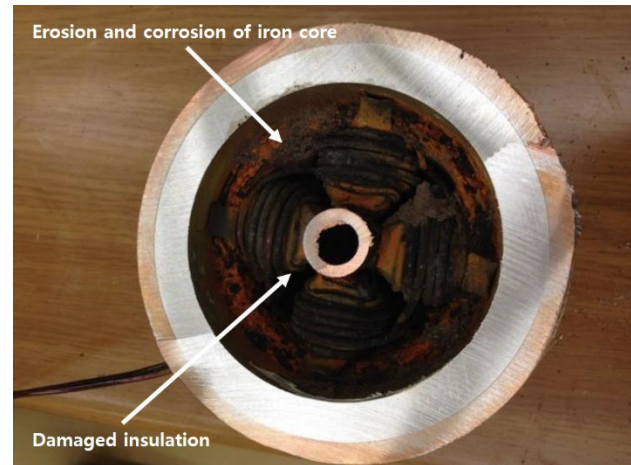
Cut-view of the failed drift tube, showing the damaged insulation and corroded iron core.
